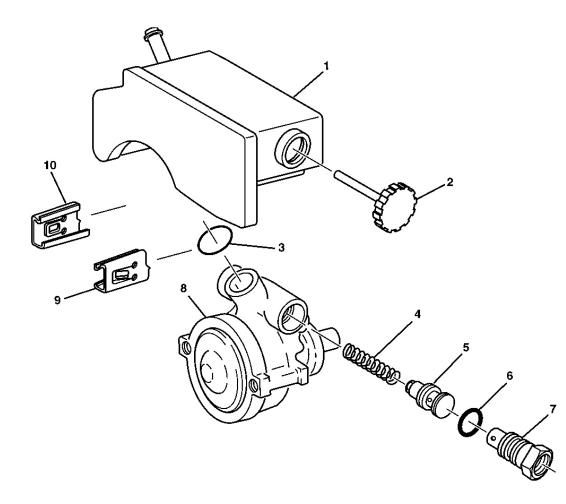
Exploded View Of Power Steering Pump Components (CB Series) Courtesy of GENERAL MOTORS CORP.
